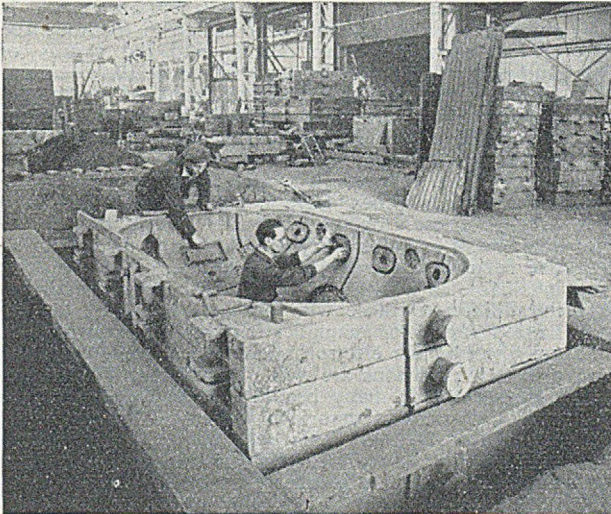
(upper left).—Mould for Condenser Door; putting the Side Cores in.
